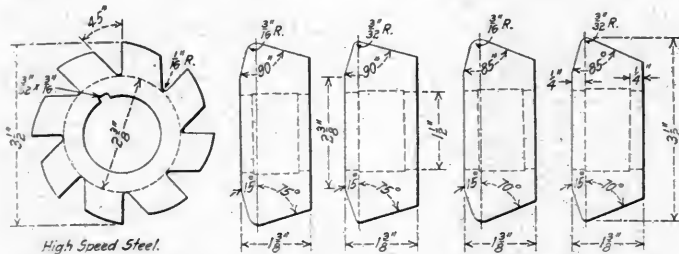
Milling Machine Cutters for Washout Plug Taps, Etc.
